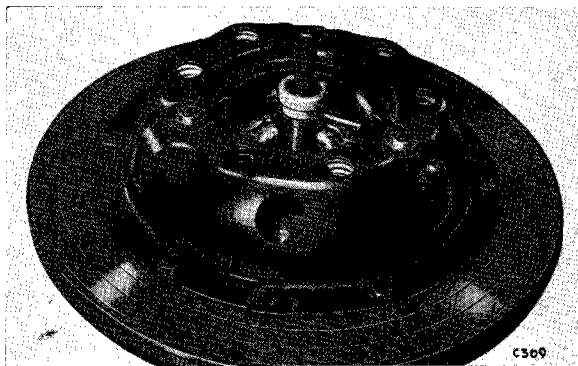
Gauge finger fitted prior to adjusting toggle height (Vitesse)
